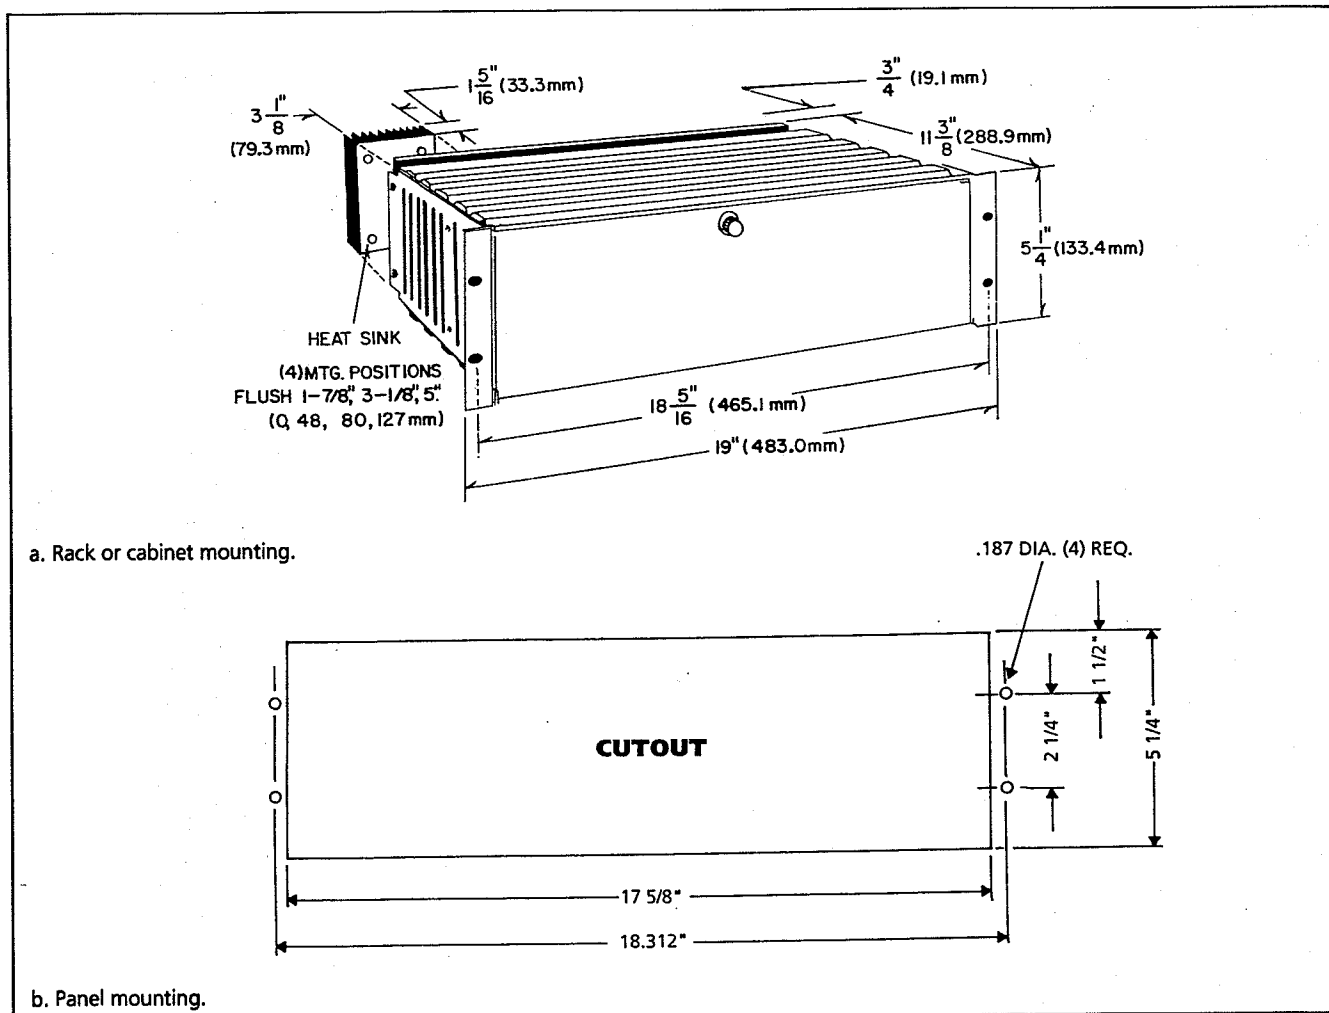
Mounting dimensions, RFL 6785P Programmable On/Off Carrier System
